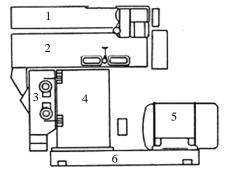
Component Parts of a Conventional Pellet Mill; 1)
